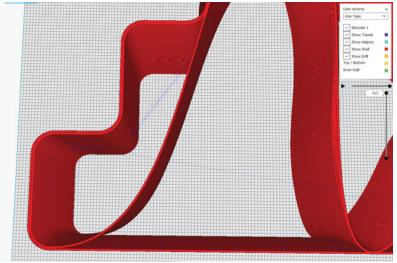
Blue lines indicating tool head travel routes present in the tool path.
